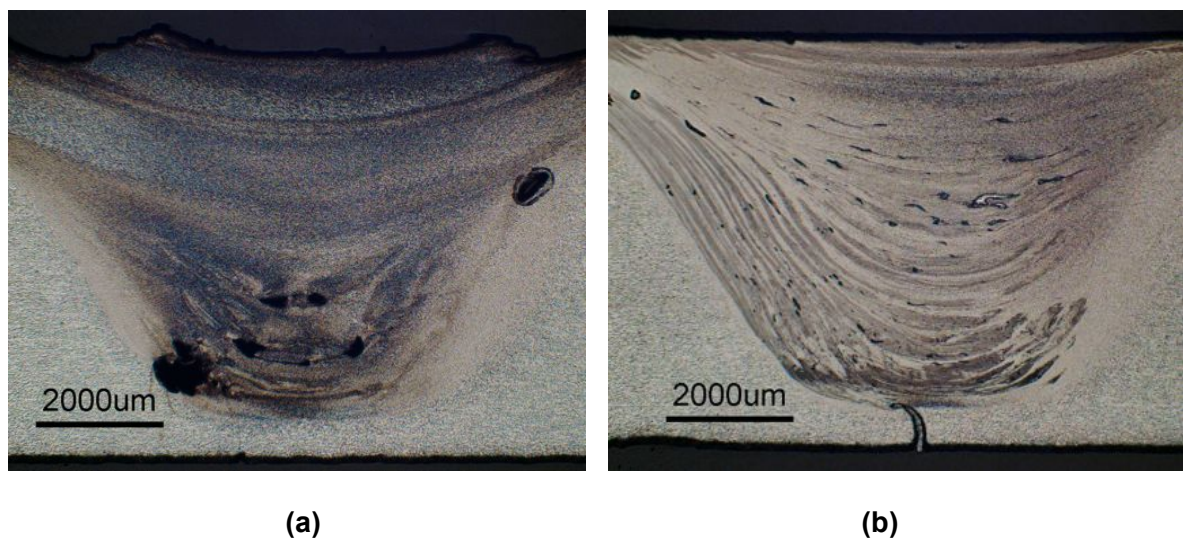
Photographs of (a) CP Ti FS weld without marker foil and (b) with Ni marker foil. Weld direction is out of the page.
